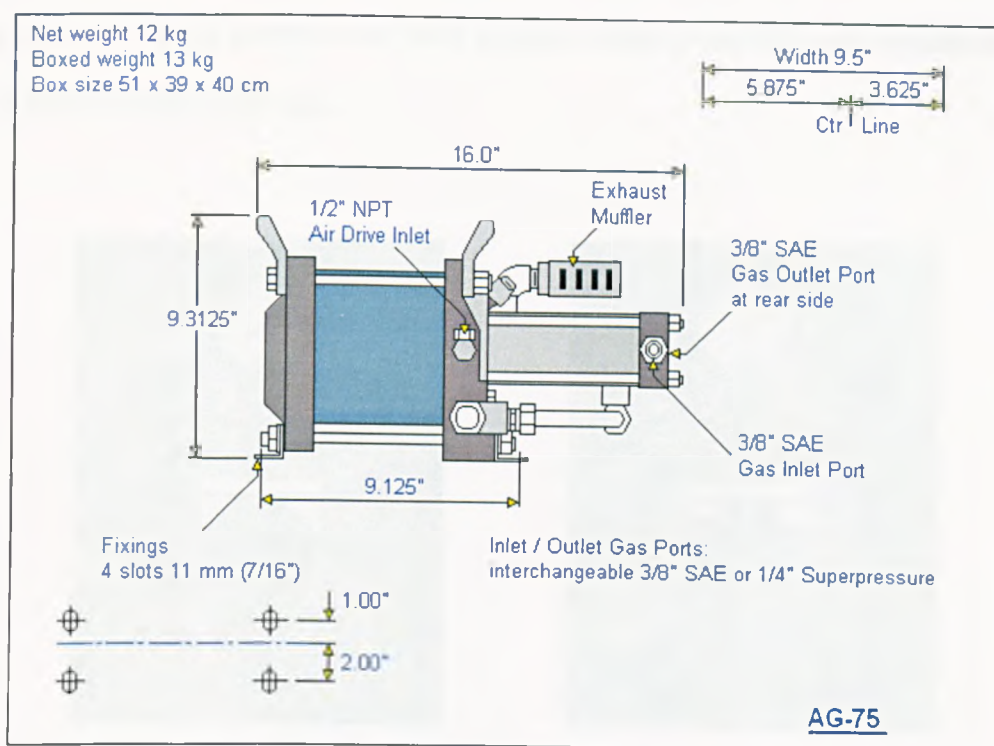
Gas booster dimensions (Haskel, 2009).
